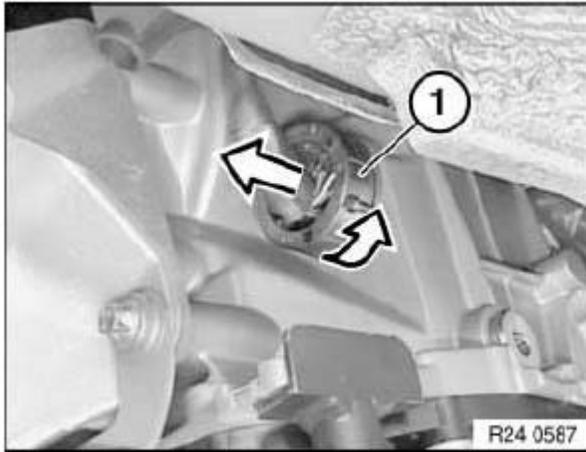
Identifying Screw And Hydraulic Lines
